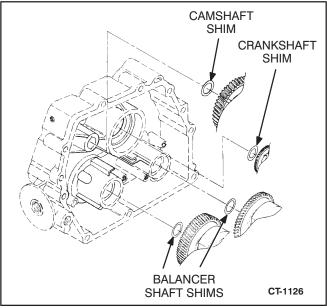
SHAFT END CLEARANCE SHIM LOCATIONS
